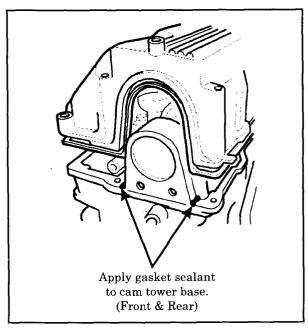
Install the Cylinder Head Cover with new Cylinder Head Cover Gasket & Sealant.
